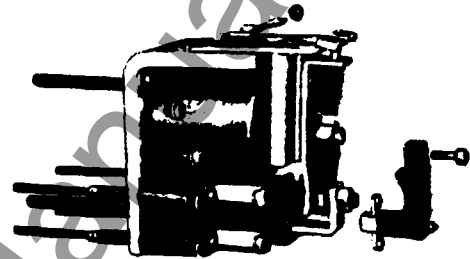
RELAY WITH THE SPRING STUD YOKE DISENGAGED FROM THE SLOTS IN THE TOP BEARING PLATE (PHOTO 292698)
